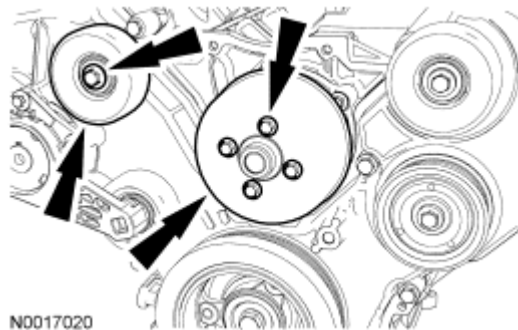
Locating Accessory Drive Belt Idler Pulley And Bolts
